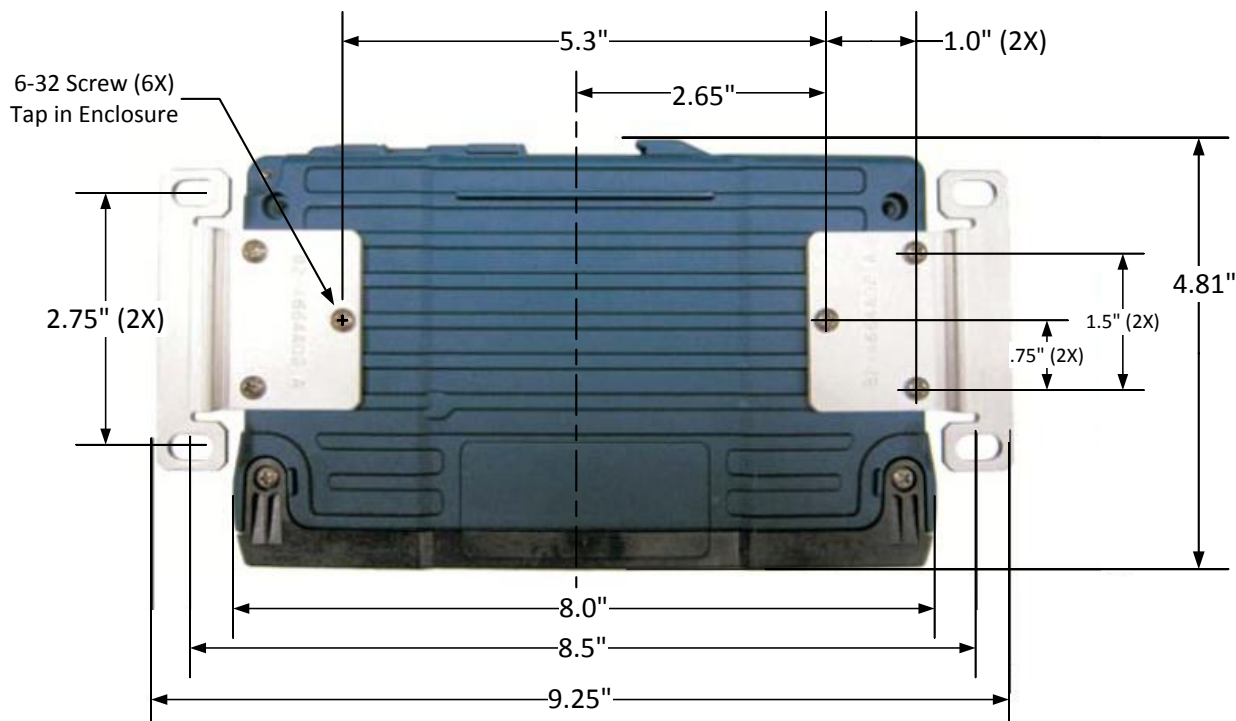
MCR Flat Mounting Bracket Dimensions
